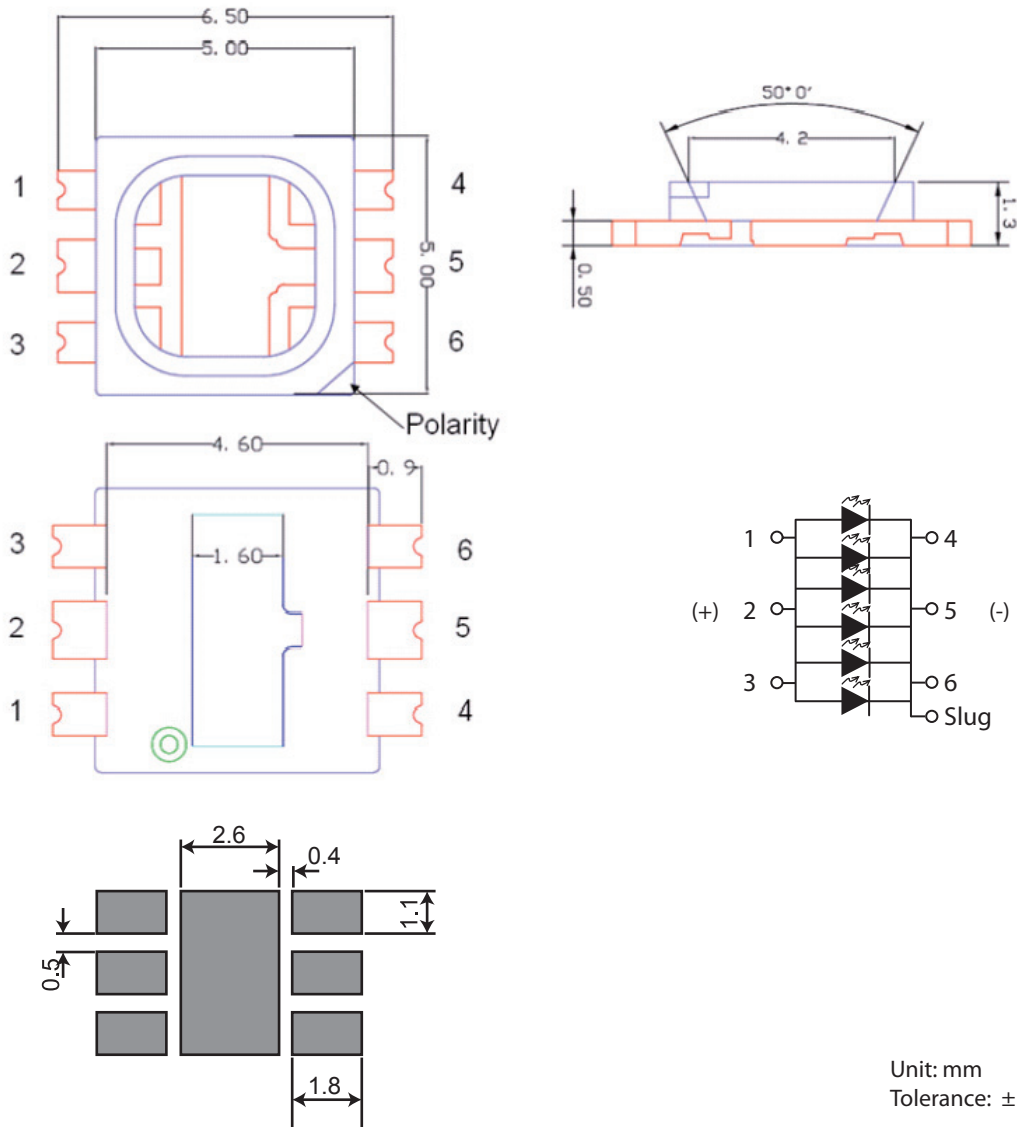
5050W PLCC Dimension, circuit diagram and recommended soldering pad
